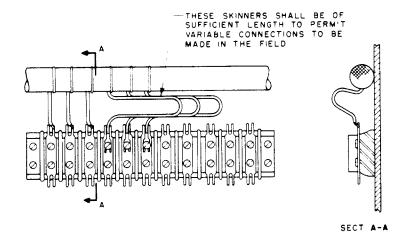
Terminal Strips — H. B. Jones Co. — No. 14 Gauge and Smaller Wires
